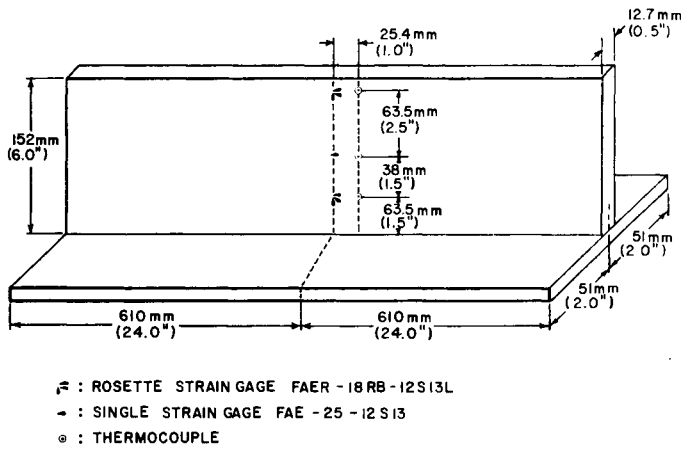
Arrangement of the strain gage and thermocouple for T-section beam.
